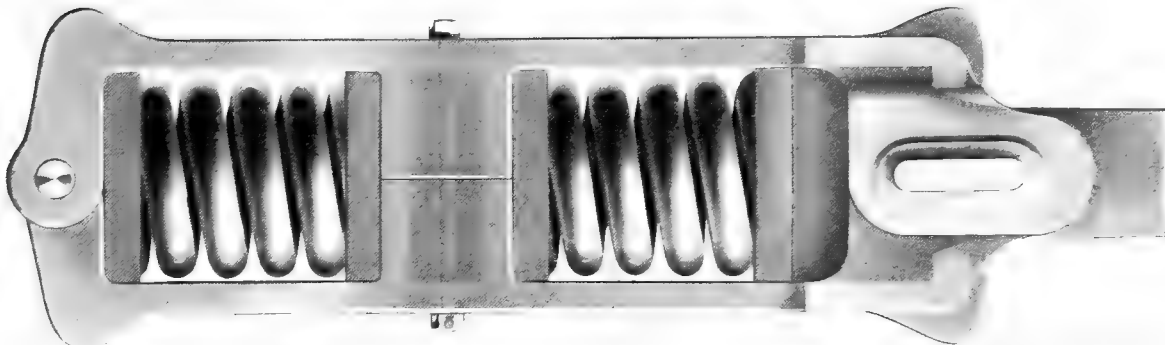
Murray Keyoke for Use with Tandem Spring Draft Gear. Keyoke Railway Equipment Company.
